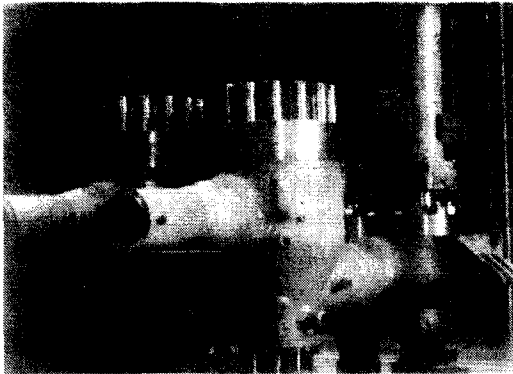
Photograph of the main stop valve casing and the control valve casing assembly
